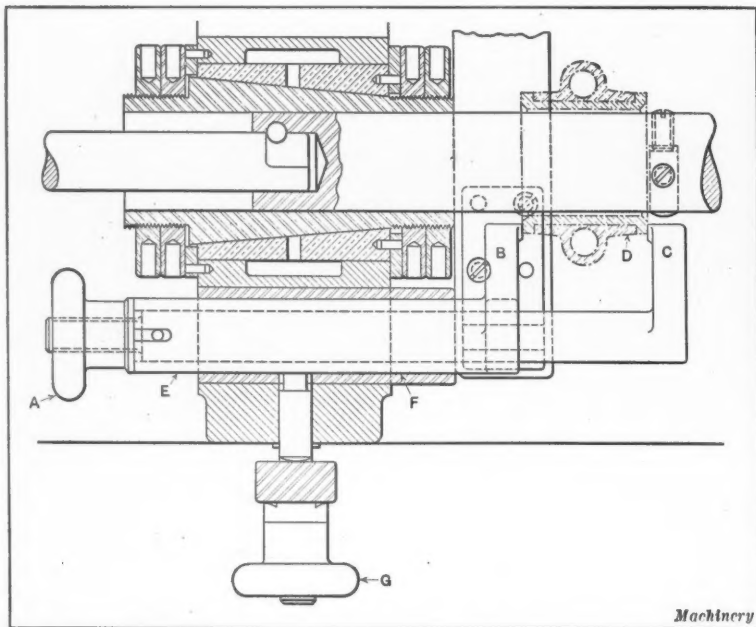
Floating Clamp used on Machine shown in Fig. 8 to prevent springing Connecting-rods
